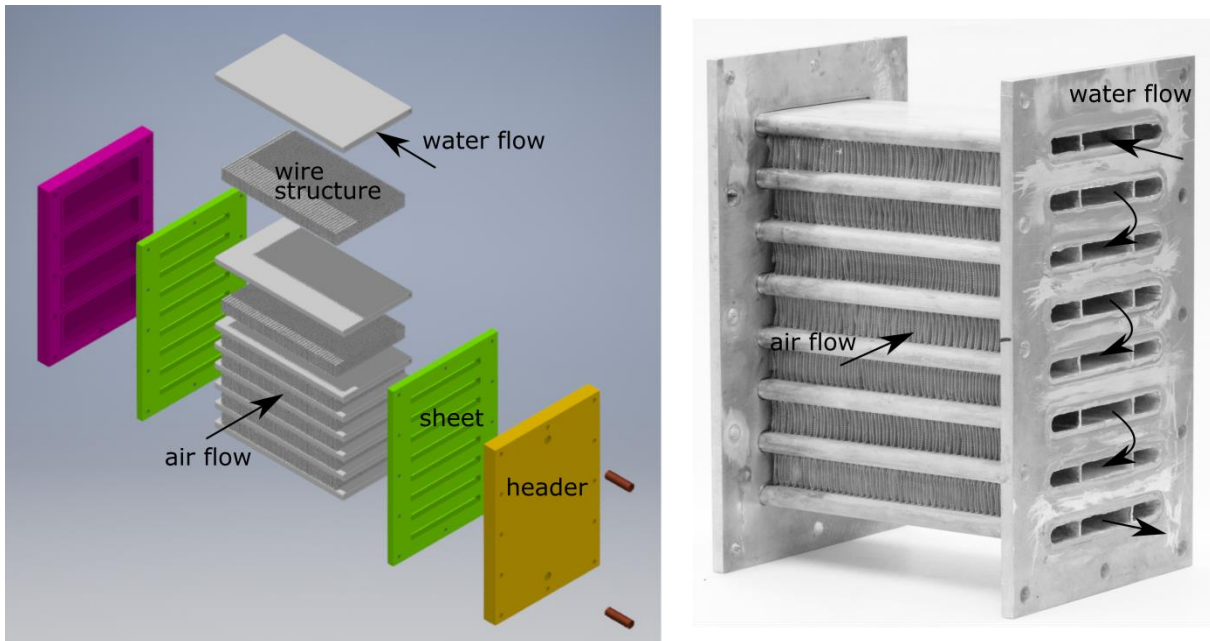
Heat exchanger sample; left: CAD drawing; right: manufactured heat exchanger (Figure: Hannes Fugmann, Fraunhofer ISE)
